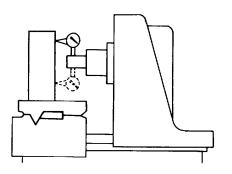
G. Top of table is square crosswise with sweep of spindle.
